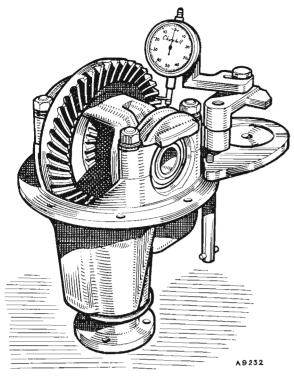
Checking crown wheel to pinion backlash (Service tools 18G 191 and 18G 191 A)
